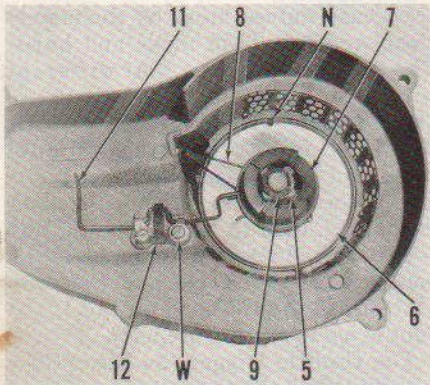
View showing rewind starter assembled. Washer (W) should be on screw indicated. Refer to Fig. PR6-15 for legend.
